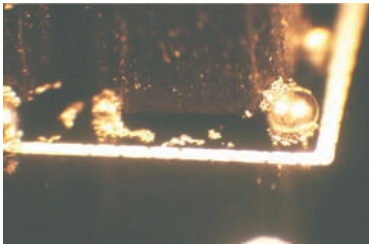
Solder balling caused by a combination of poor paste aperture and component design.
